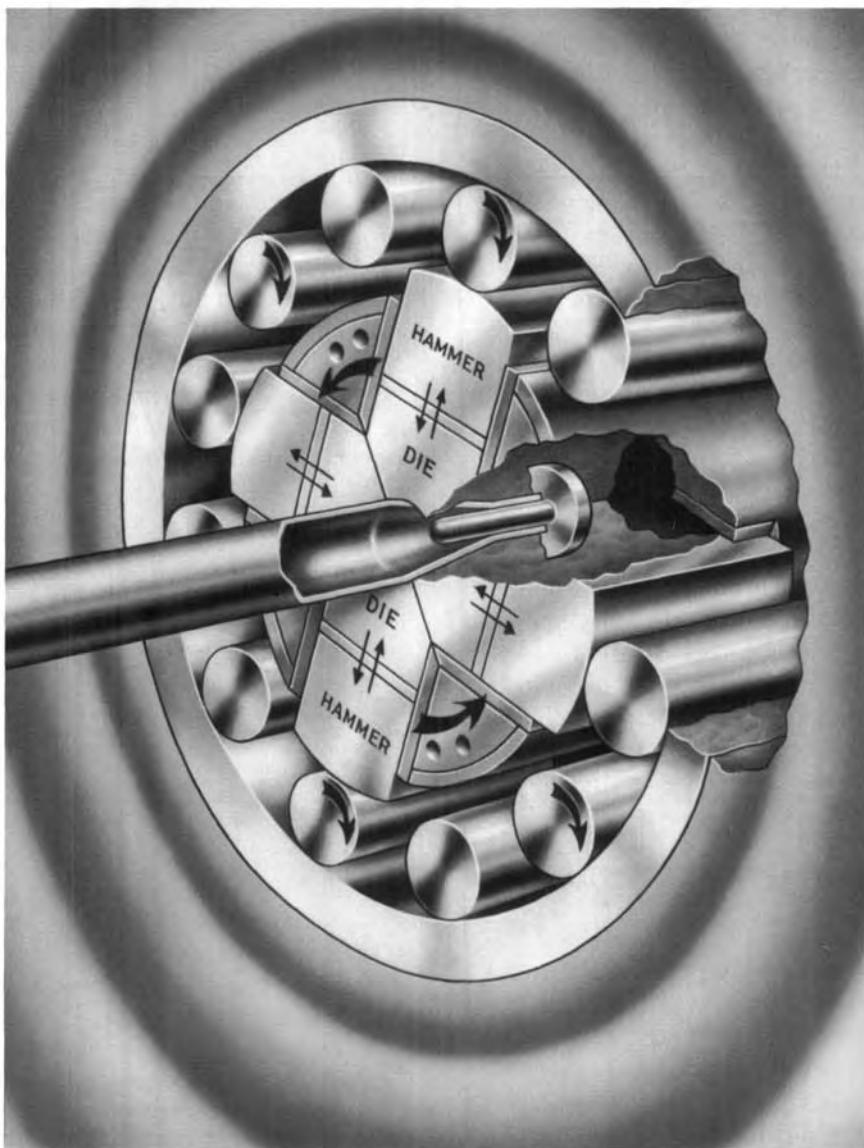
F1 A conventional rotary-swaging die reducing the diameter of a tubular workpiece. (Courtesy Fenn Manufacturing Co.)
